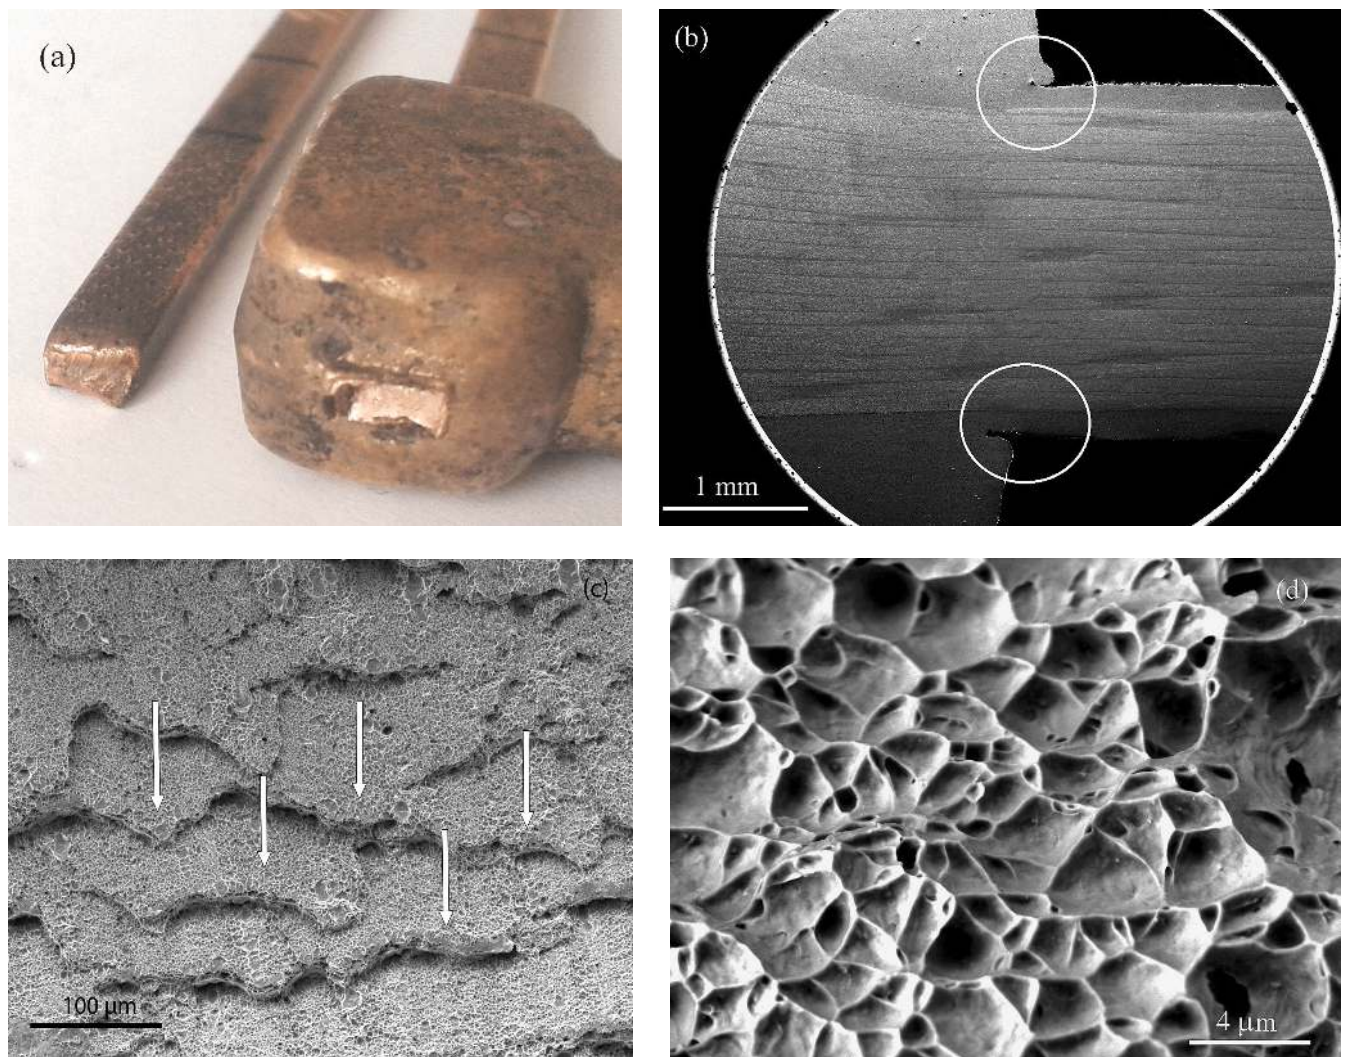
Location of rupture and texture of fracture surface: (a) location of joint rupture; (b) locations of stress concentration in the cross-section of joint; (c) view of stair-shaped surface of fracture; (d) view of different sizes dimples on the fracture surface.
